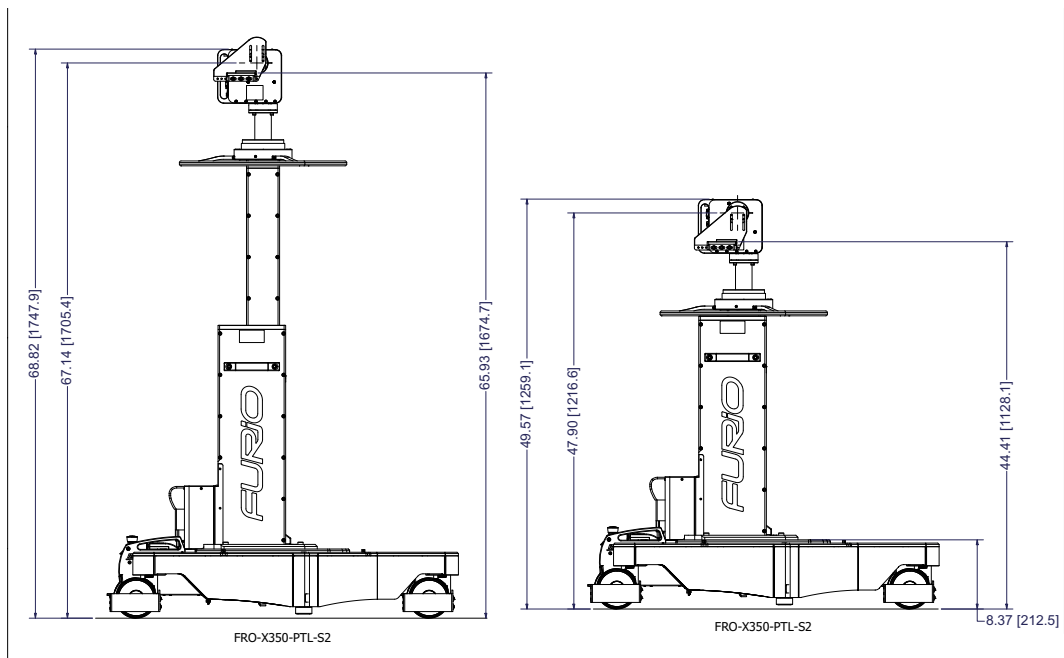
Dimensions of the BlackBird S2 Pedestal with an X350 Head (side view)
